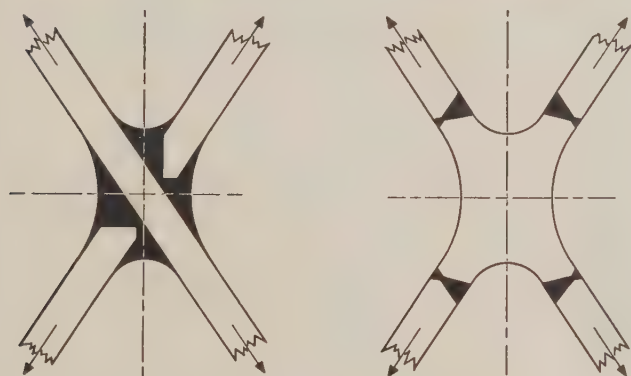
TYPES OF INTERSECTION WITHOUT AND WITH TRANSITION PIECE
